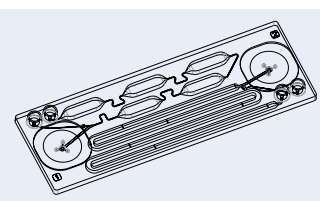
Schematic drawing of blister test chip Fluidic 0522
